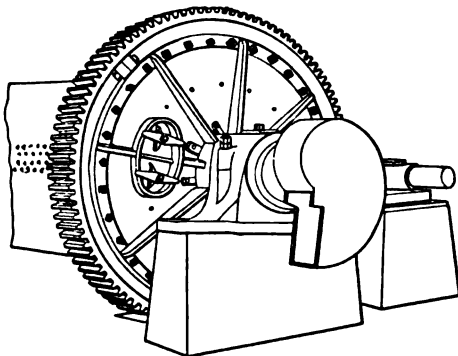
SCOOP FEED FOR TUBE MILL.
